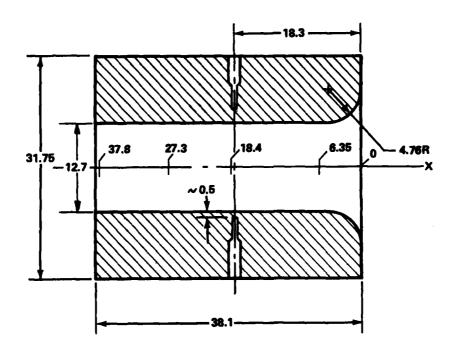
SHOCK TUBE GUN TEST SAMPLE
